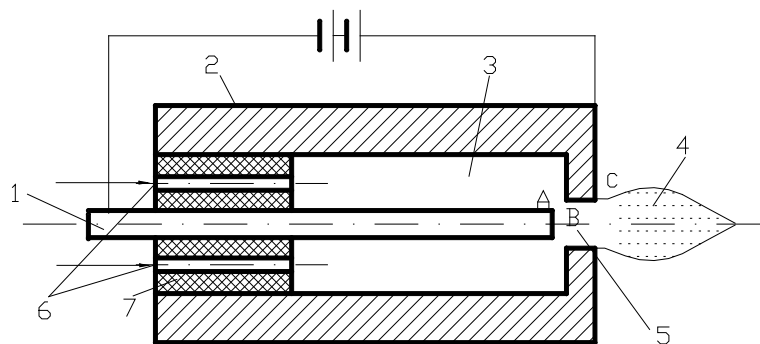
The principle figure of plasma welding torch. 1. Center electrode, 2. Wall of welding torch, 3. Inter antrum, 4. Blaze, 5. Spout, 6. Entrance of gas
